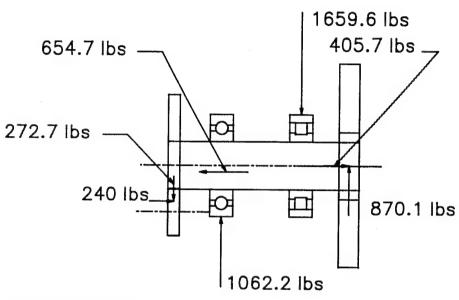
INPUT PINION SHAFT LOADING FOR COMBINED HELICAL EXAMPLE
